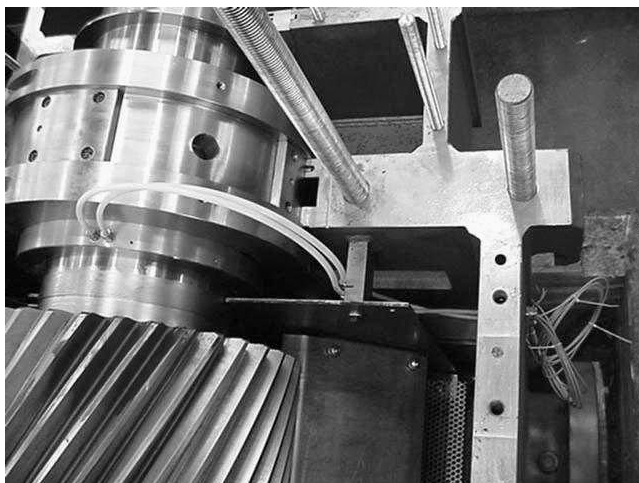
Example of Bearing Thermal Probes Installed from Casing Outside.
